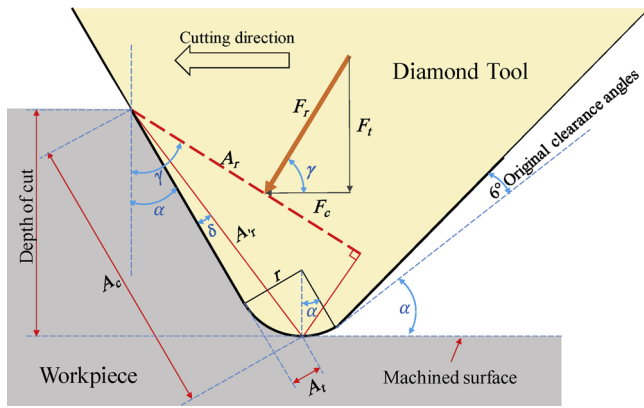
Model for calculating cutting pressure using a tool with a negative rake angle.
